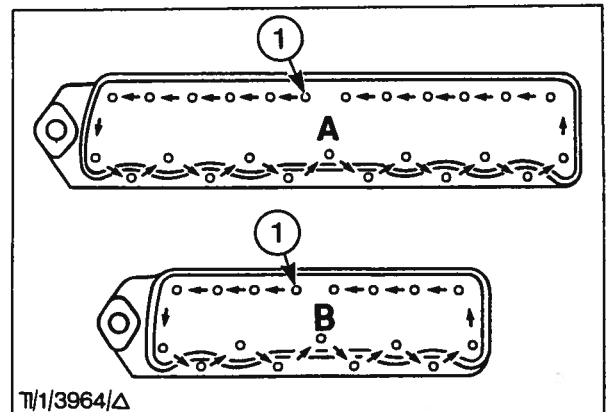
Cylinder Head Bolts Tightening Sequence
